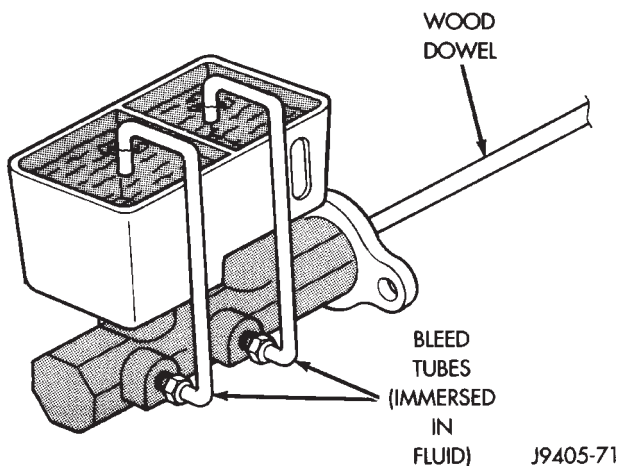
Typical Method Of Bench Bleeding Master Cylinder
